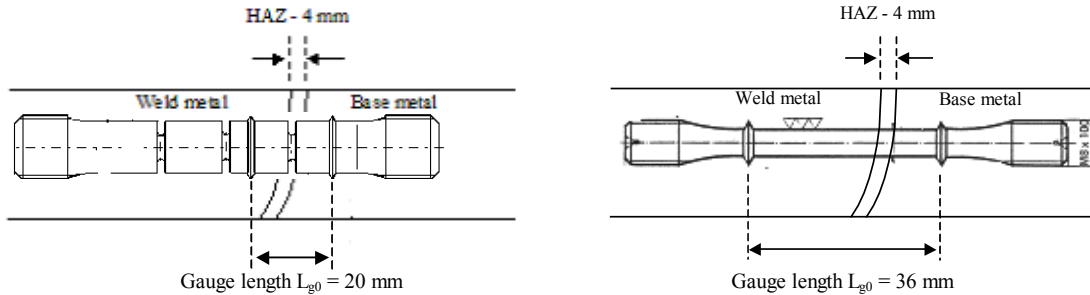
Location of specimens in the weldment (NC1.2 and SC specimens)
